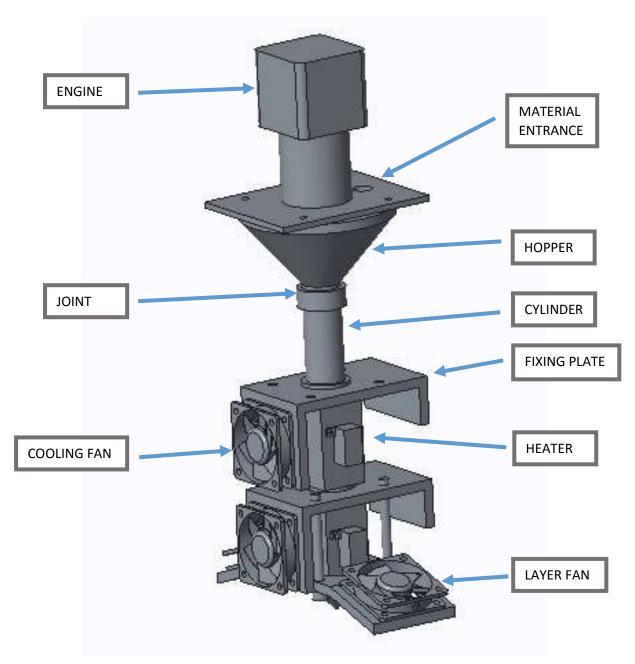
3d Model of the final assembly with all the parts of the printer's head.
